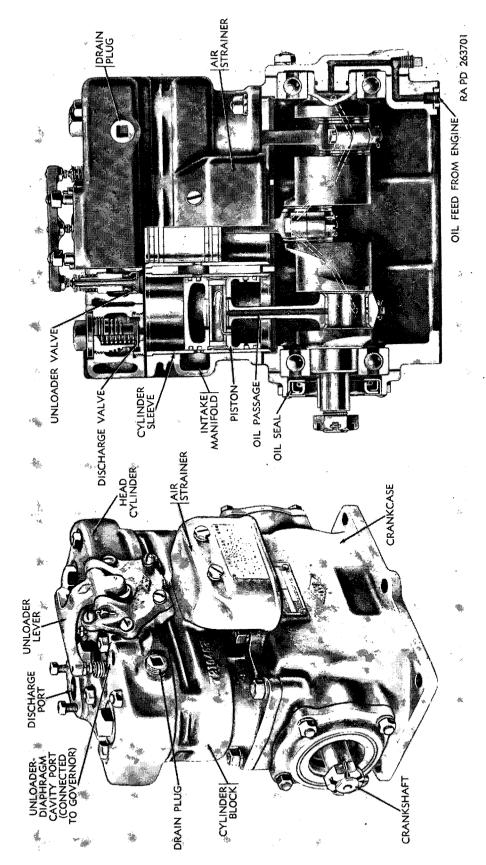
Three-cylinder engine-lubricated air-cooled air compressor.
